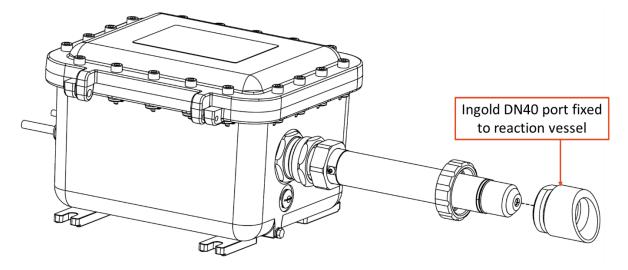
Fitting an Ingold IRmadillo probe into an Ingold Port
